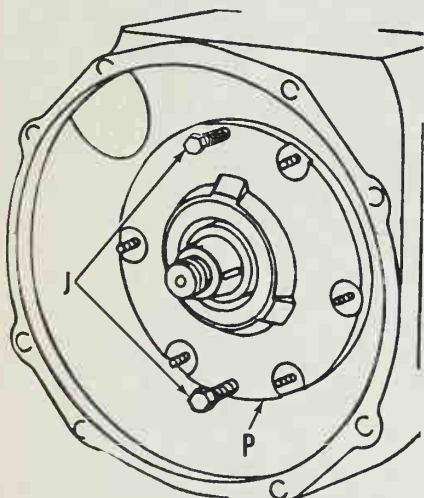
Main bearing support (P) may be dislodged using jackscrews (J) in holes provided.
